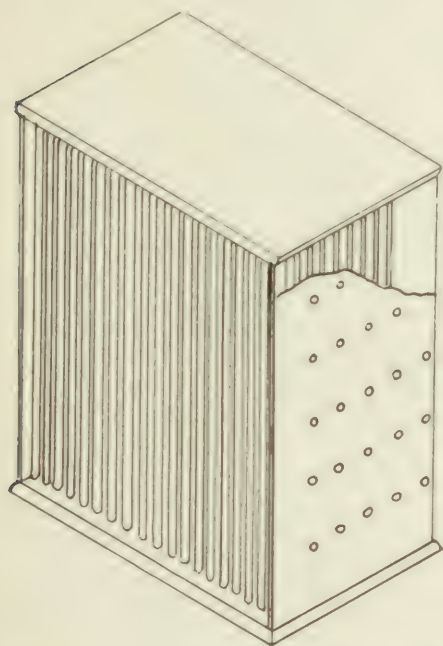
HEATER CASING, SHOWING HOLES THROUGH WHICH PRESSURE IN COILS WAS MEASURED
